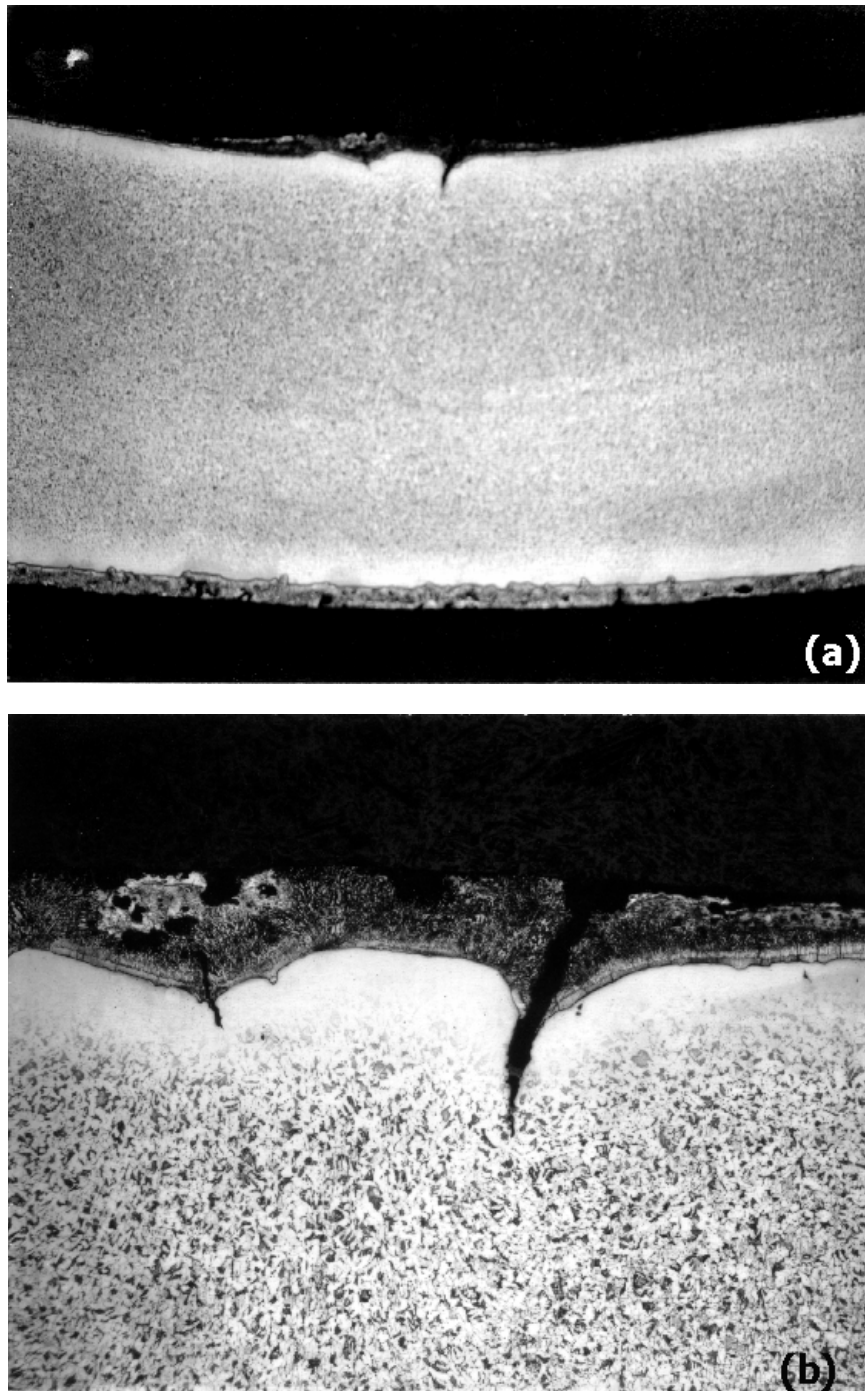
Cross section of galvanized A53 carbon steel pipe. Sharp defects occur in the toe of the seam weld on the inside wall of the pipe. Magnification: 16X, 64X .
